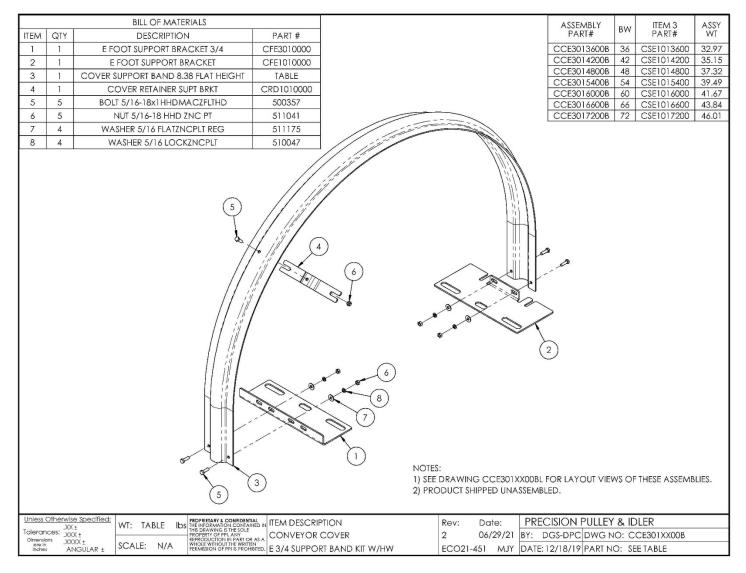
E 3/4 COVER SUPPORT BAND ASSEMBLY WITH LIST OF COMPONENTS
